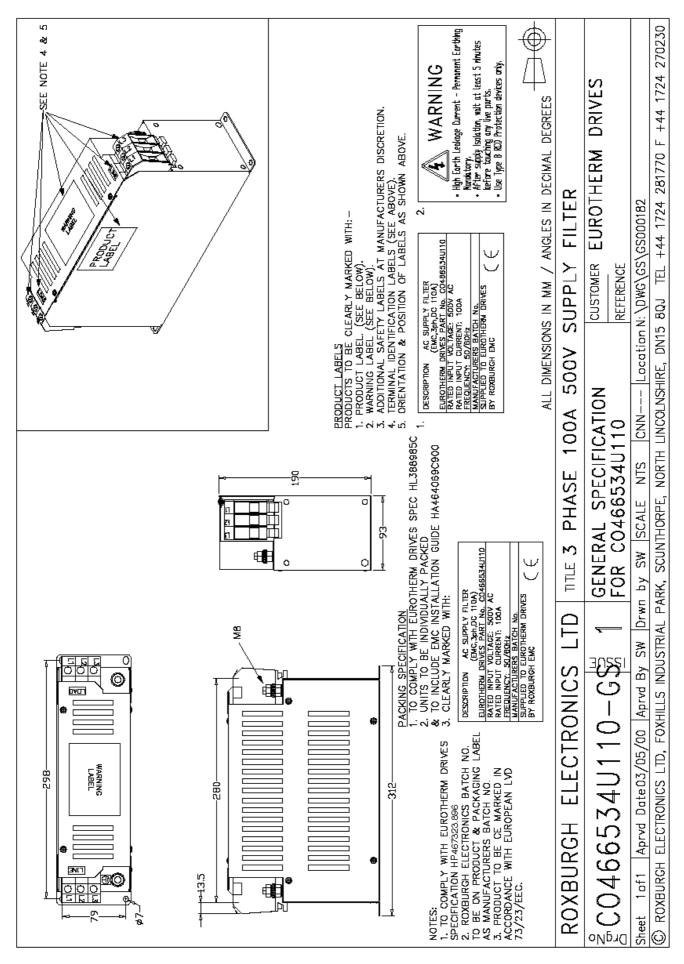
Filter Mounting Details, Part No. CO466534U110 for 590+ Frame 2:110 Amp
